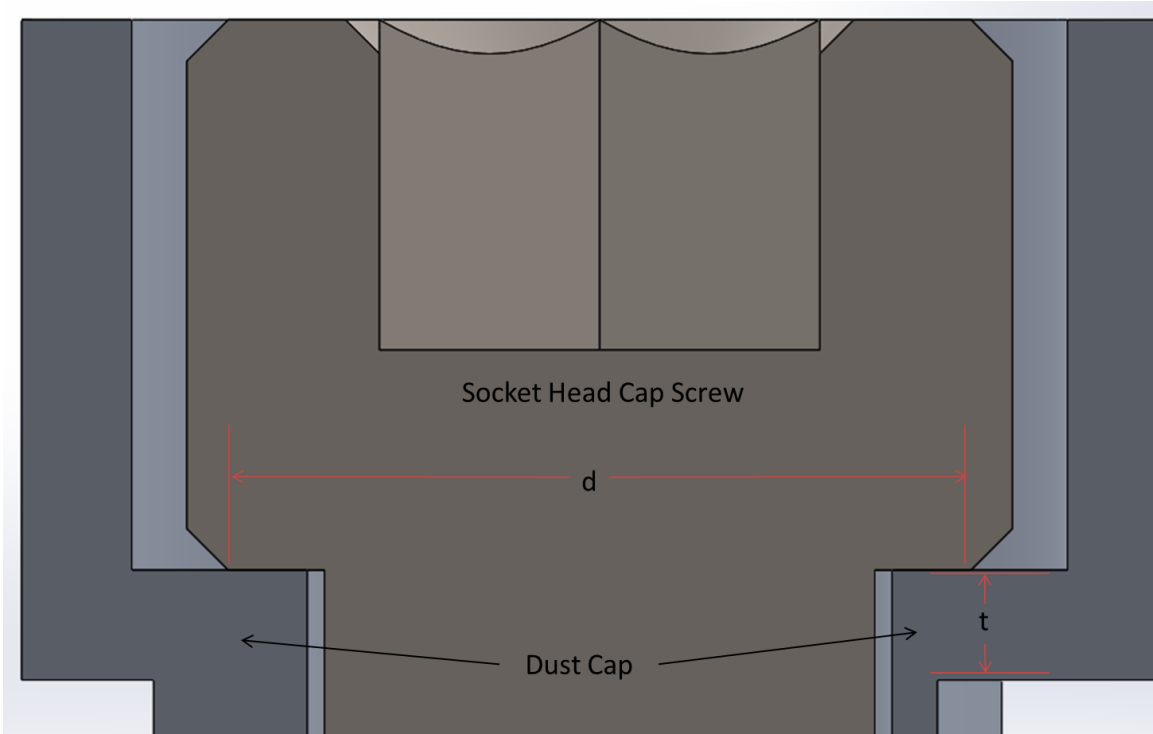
Cross Section of Connection between Bolt and Dust Cap
